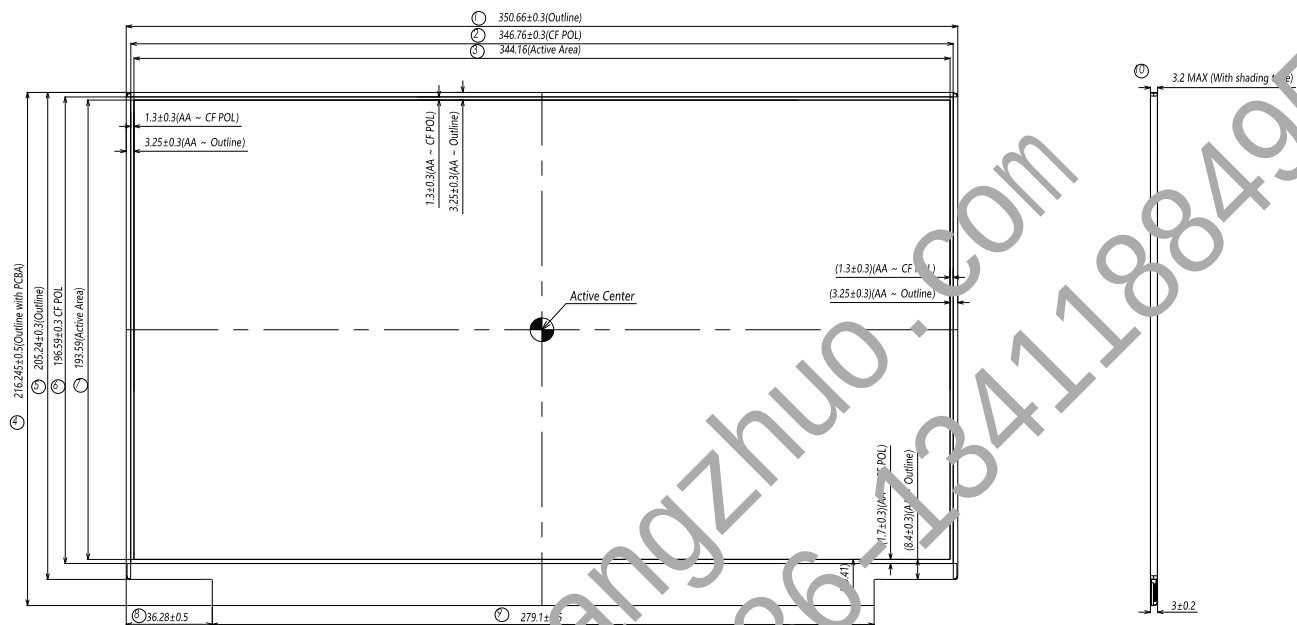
TFT-LCD Module Outline Dimension (Front View)
